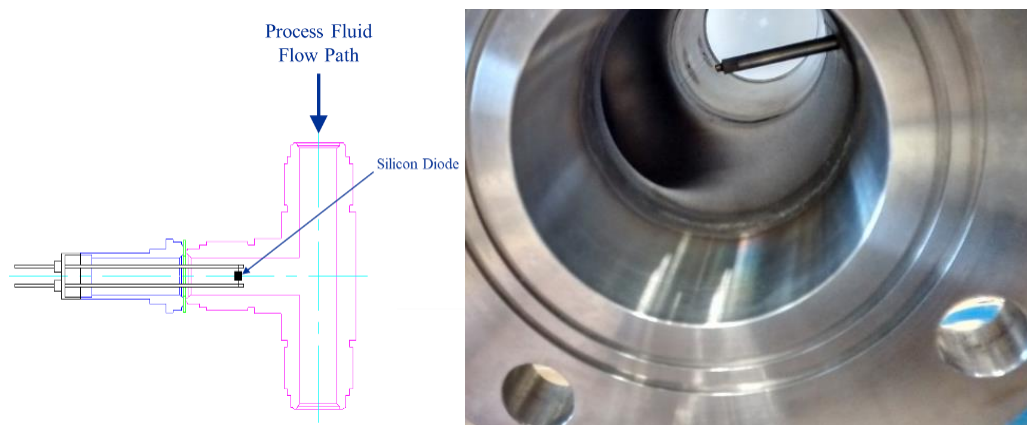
Probe style internal fluid mounting mechanisms: on an electrical VCR connector (left) and epoxied into a tube (right).
